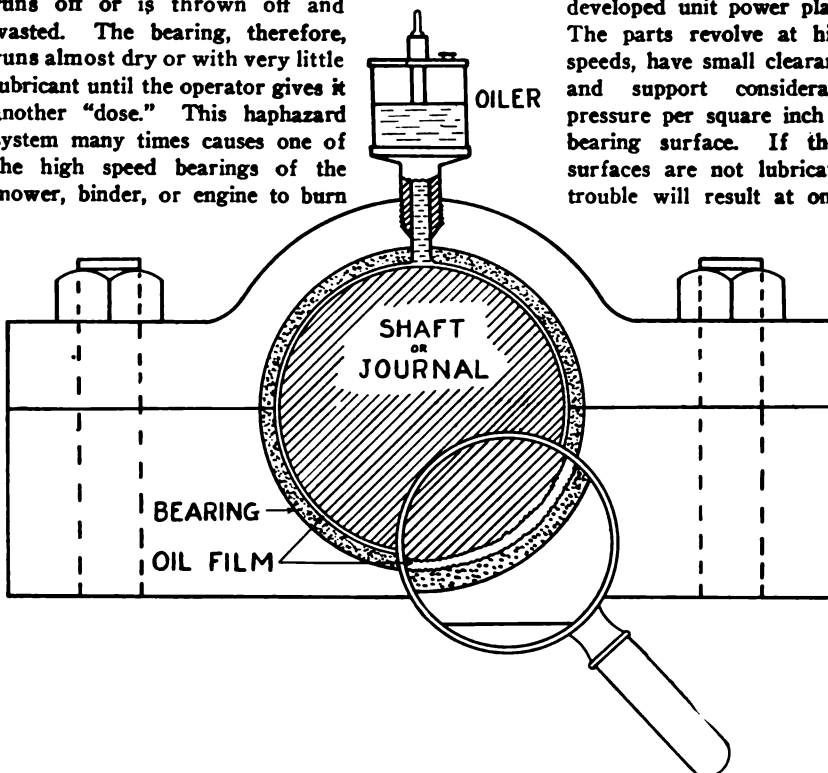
This Shows How a Bearing Would Appear if the End Were Viewed Under a Microscope. Note the rough surface of both bearing and journal and how important it is that they be kept apart by a film of oil.
